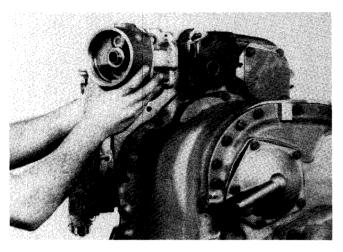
Position new valve to pump gasket on studs. Install charging pump and filter adaptor on studs.
